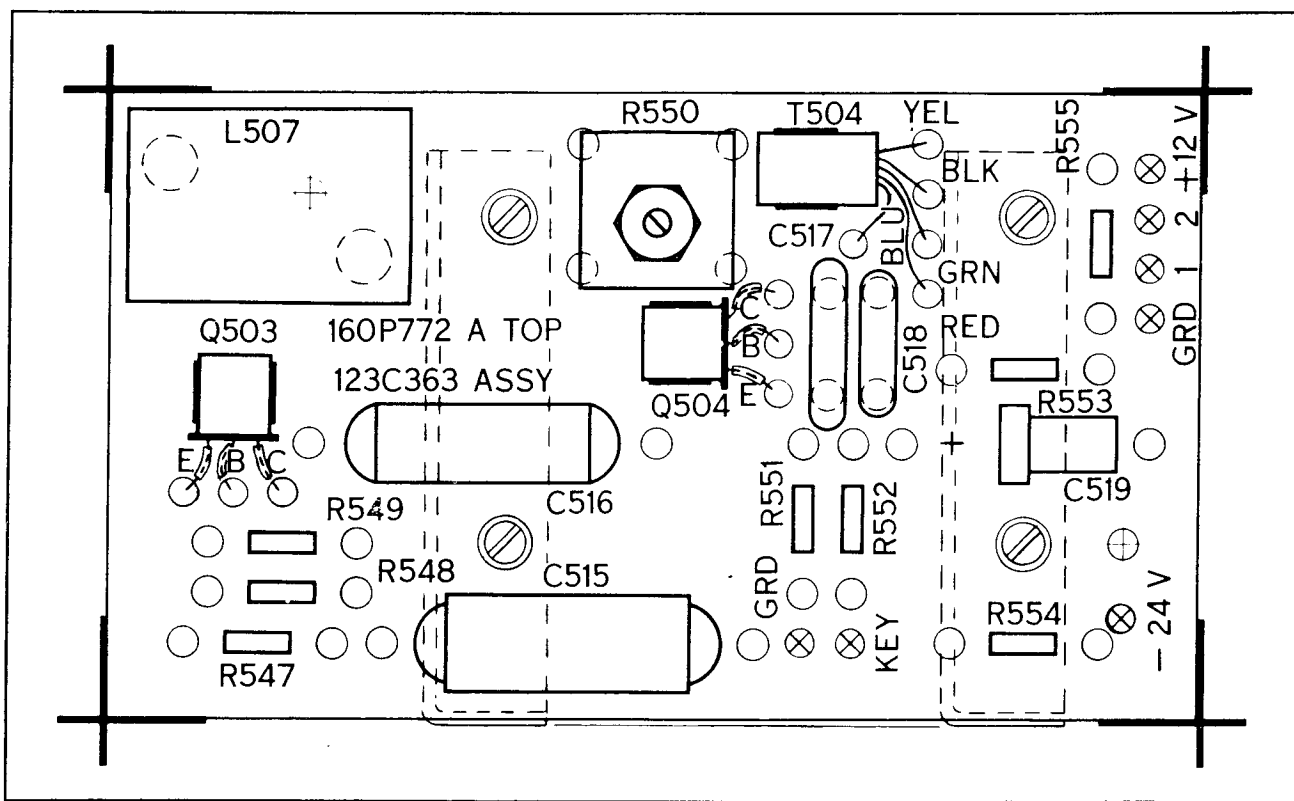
A. 1000 Cycle Tone Generator, Location of Parts on Printed Board—E525
